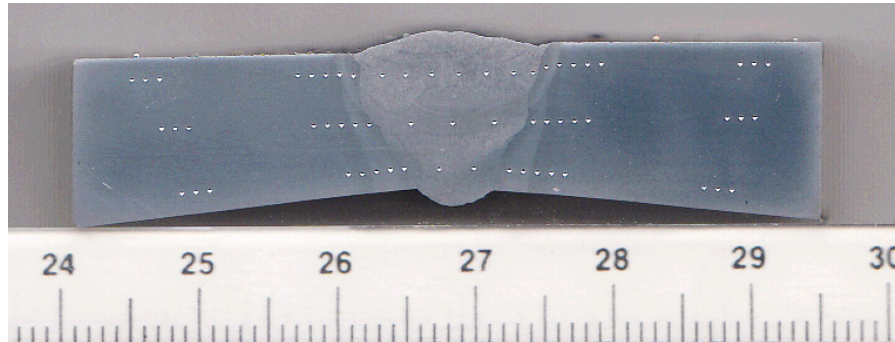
C-Mn (X65) welded with Coreweld HBQ as filler wire at 150bar and macro close to 12o'clock position.
